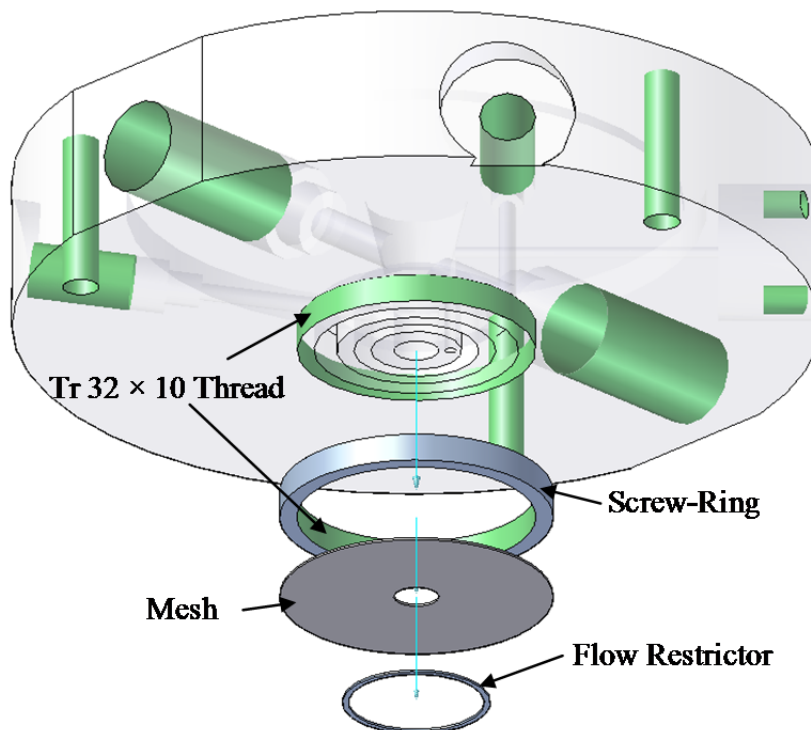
Rendered exploded view of the redesigned mesh assembly (revision H)
